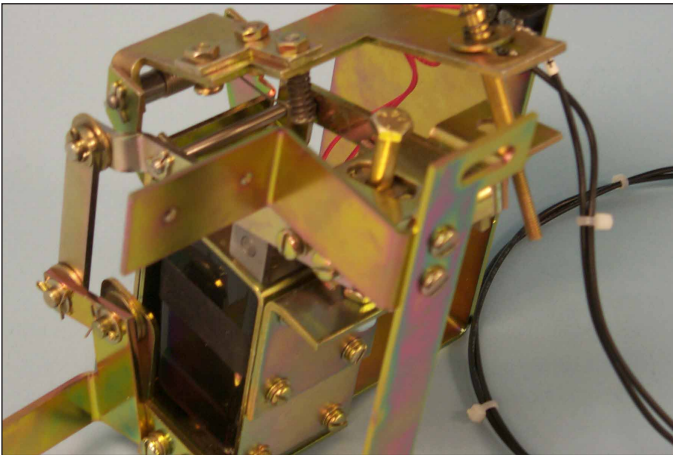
Auxiliary Switch Mounting Bracket Installed on the DTA Assembly.
